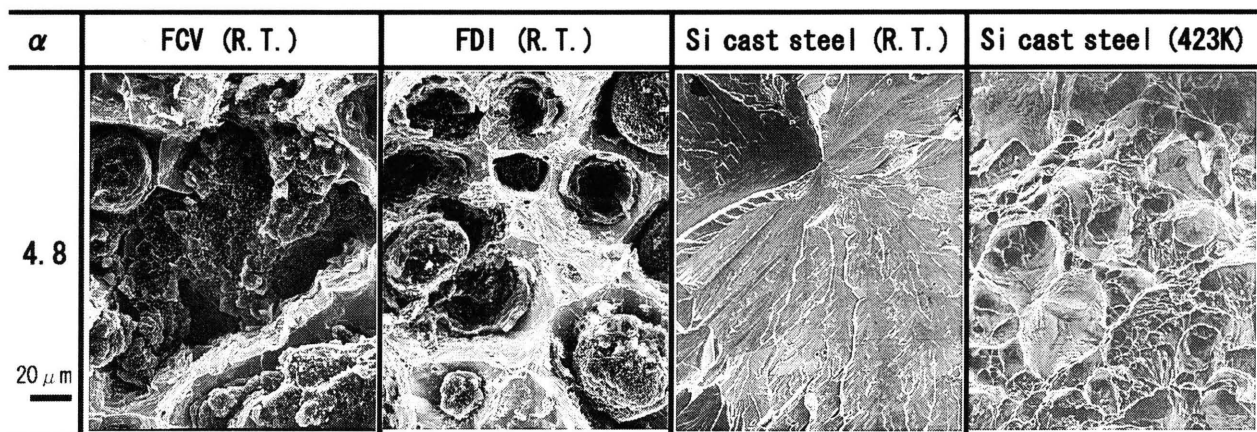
SEM observation of impact fracture surfaces of notched CV iron(FCV), SG iron(FDI) and Si cast steel specimens($\alpha=4.8$).
